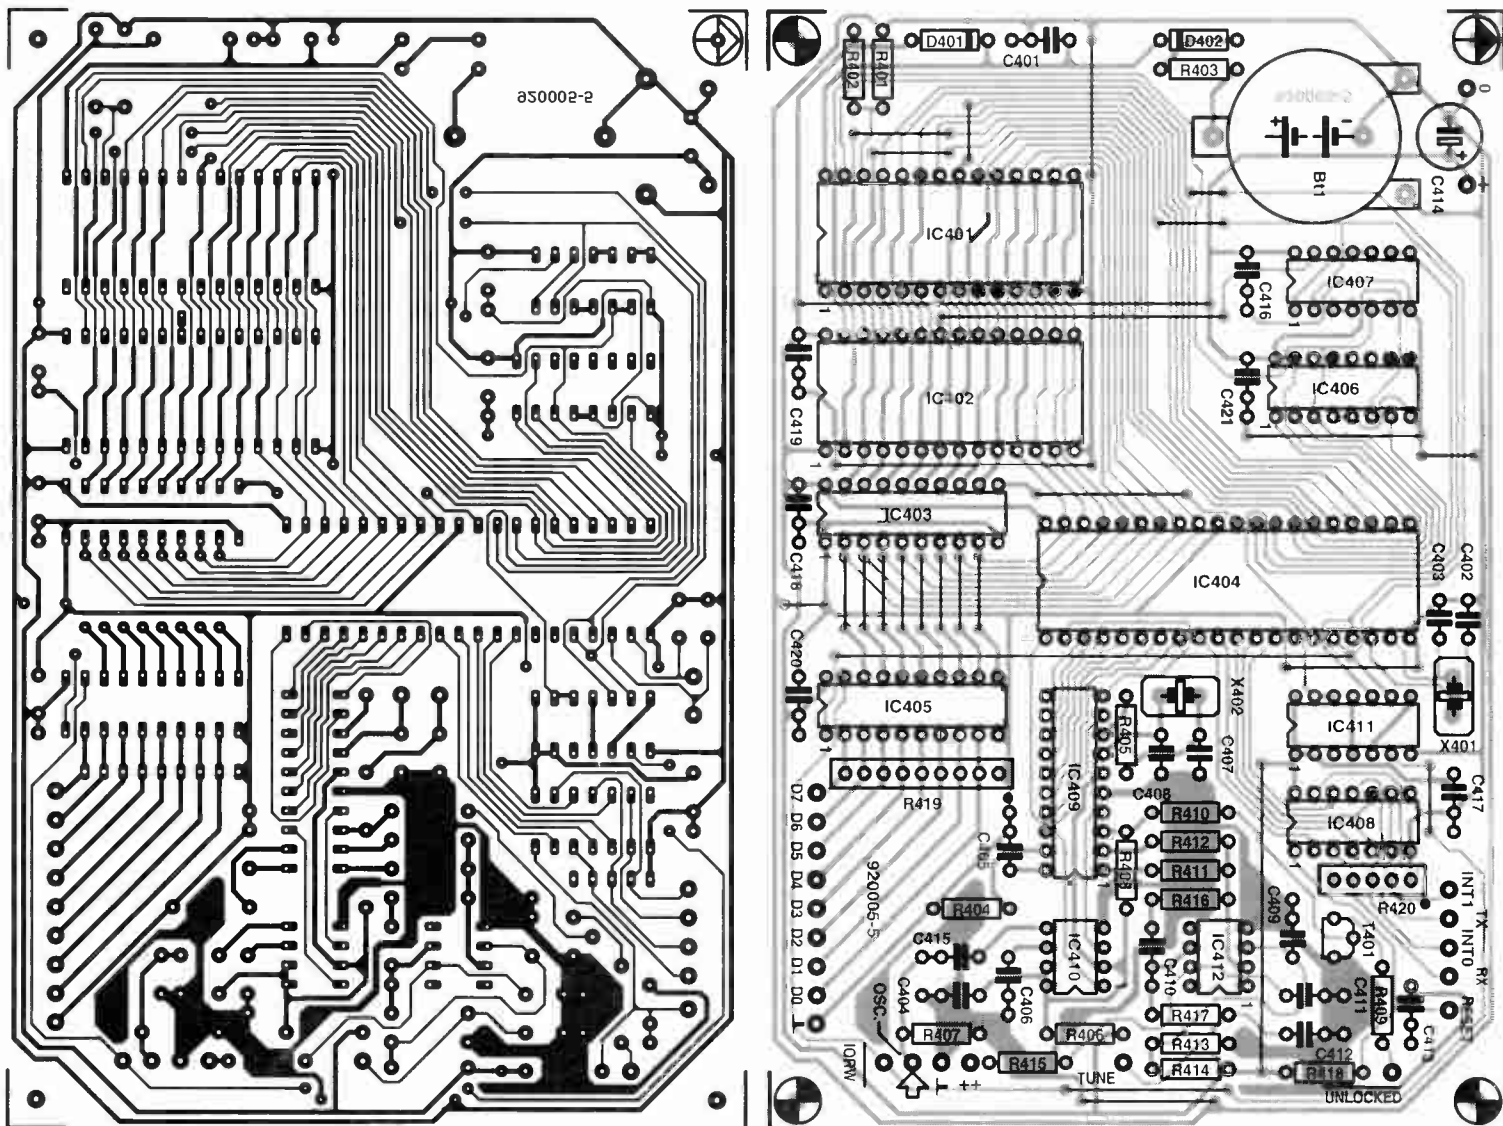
Track layout (mirror image) and component mounting plan of the synthesizer board.
